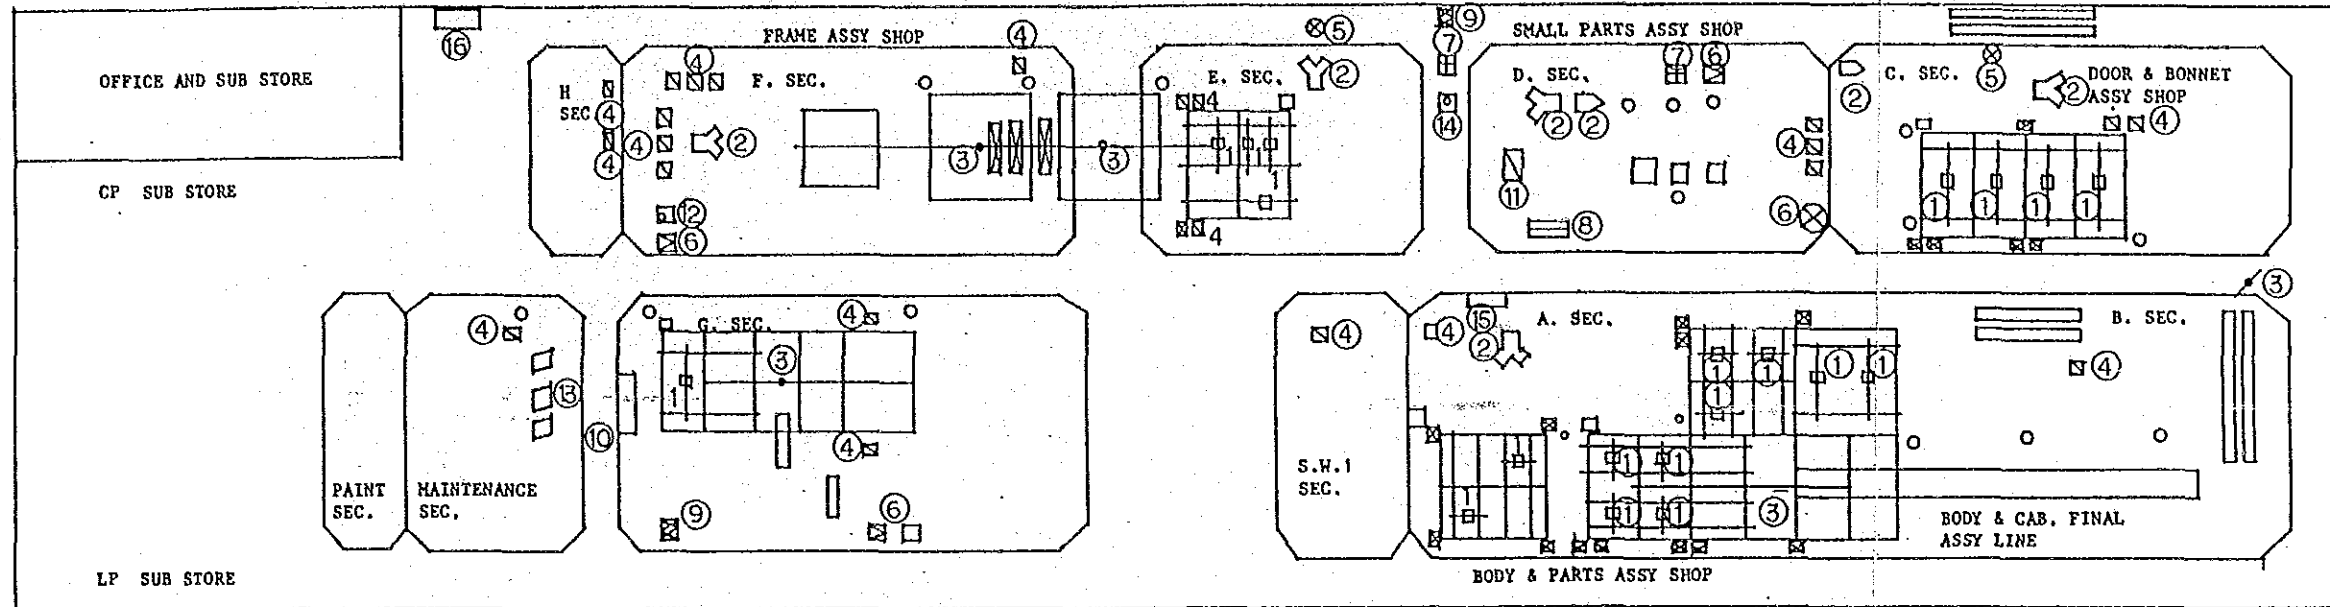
NO.4 HEAVY INDUSTRY BODY ASSEMBLY SHOP EQUIPMENT LAYOUT
